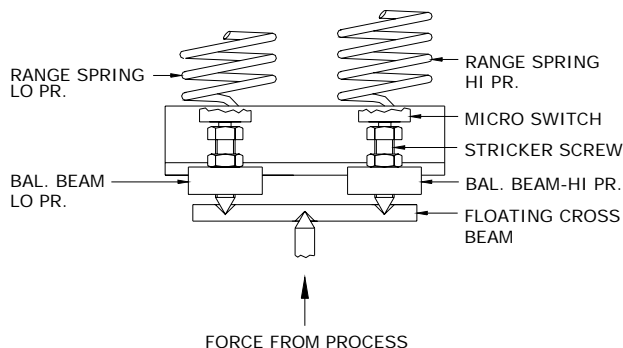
Side-view of Mechanical Frame S.A. of Dual set-point version
